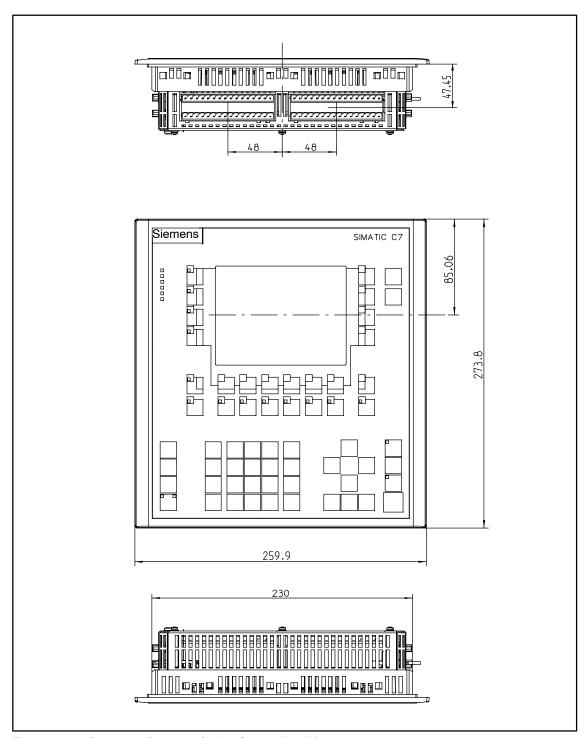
Dimension Drawings for the C7-635 Key (Measurements in mm)
